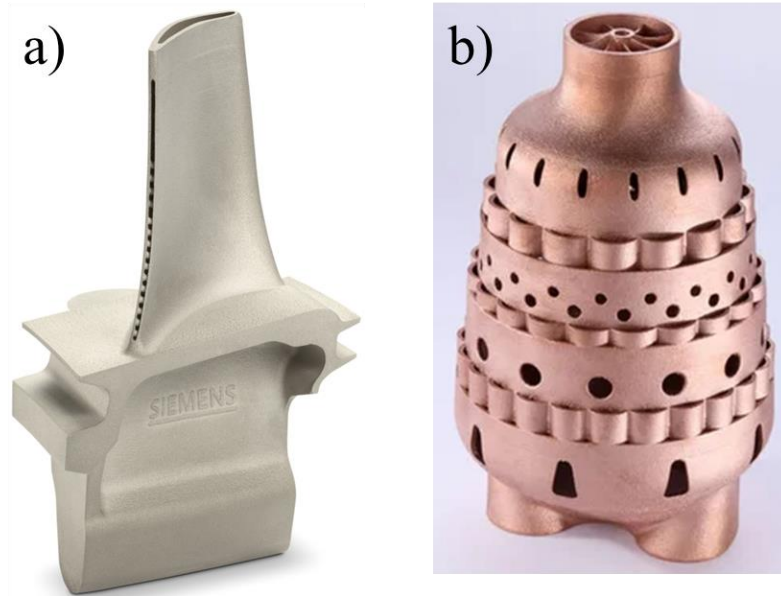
Additively manufactured metallic parts: a) Turbine blade manufactured by Siemens (nickel superalloy CM247) [94] and b) Copper combustion chamber fabricated by EOS [101].
